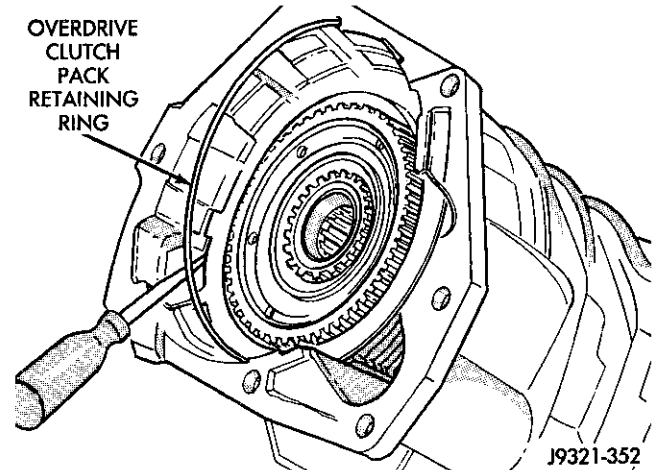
Removing Overdrive Clutch Pack Retaining Ring
